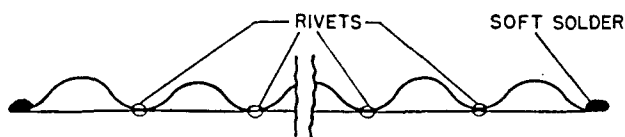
Section through heat collector units with one corrugated and one plane sheet
